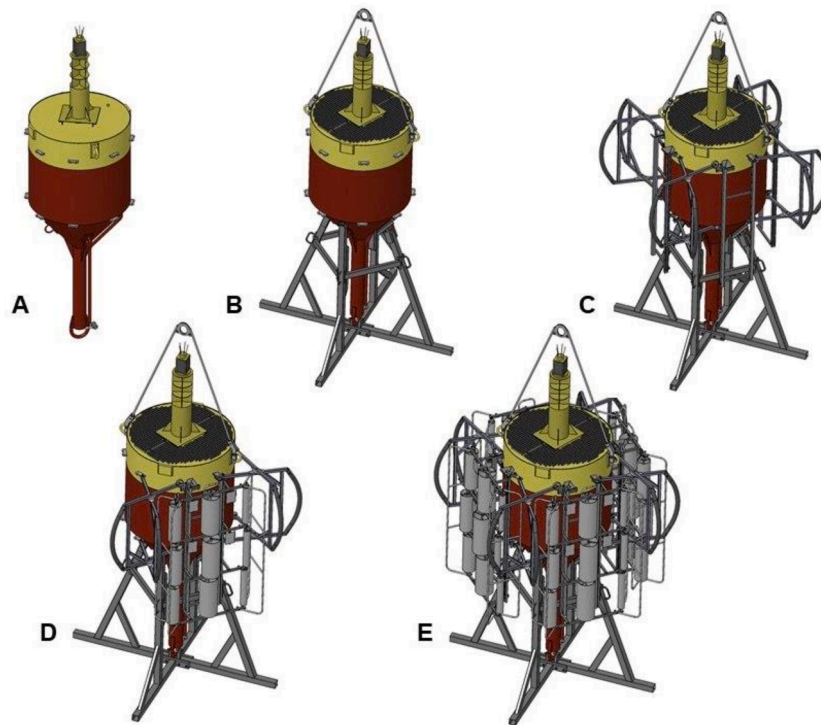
Steel construction mounted on the spare buoy. (A) 16 welding points as basis for fixation of TBSU. (B) Buoy fixed in a holding frame fitted a removable lifting arc and safety grating on top of the buoy body. (C) Attachment of main steel frame (MSF, racks), skirting protections (SUPs) between the four MSF. (D) One side of the buoy with mounted test body frame (TBF) and two SUPs. (E) Buoy with fully mounted test body support unit (TBSU).
